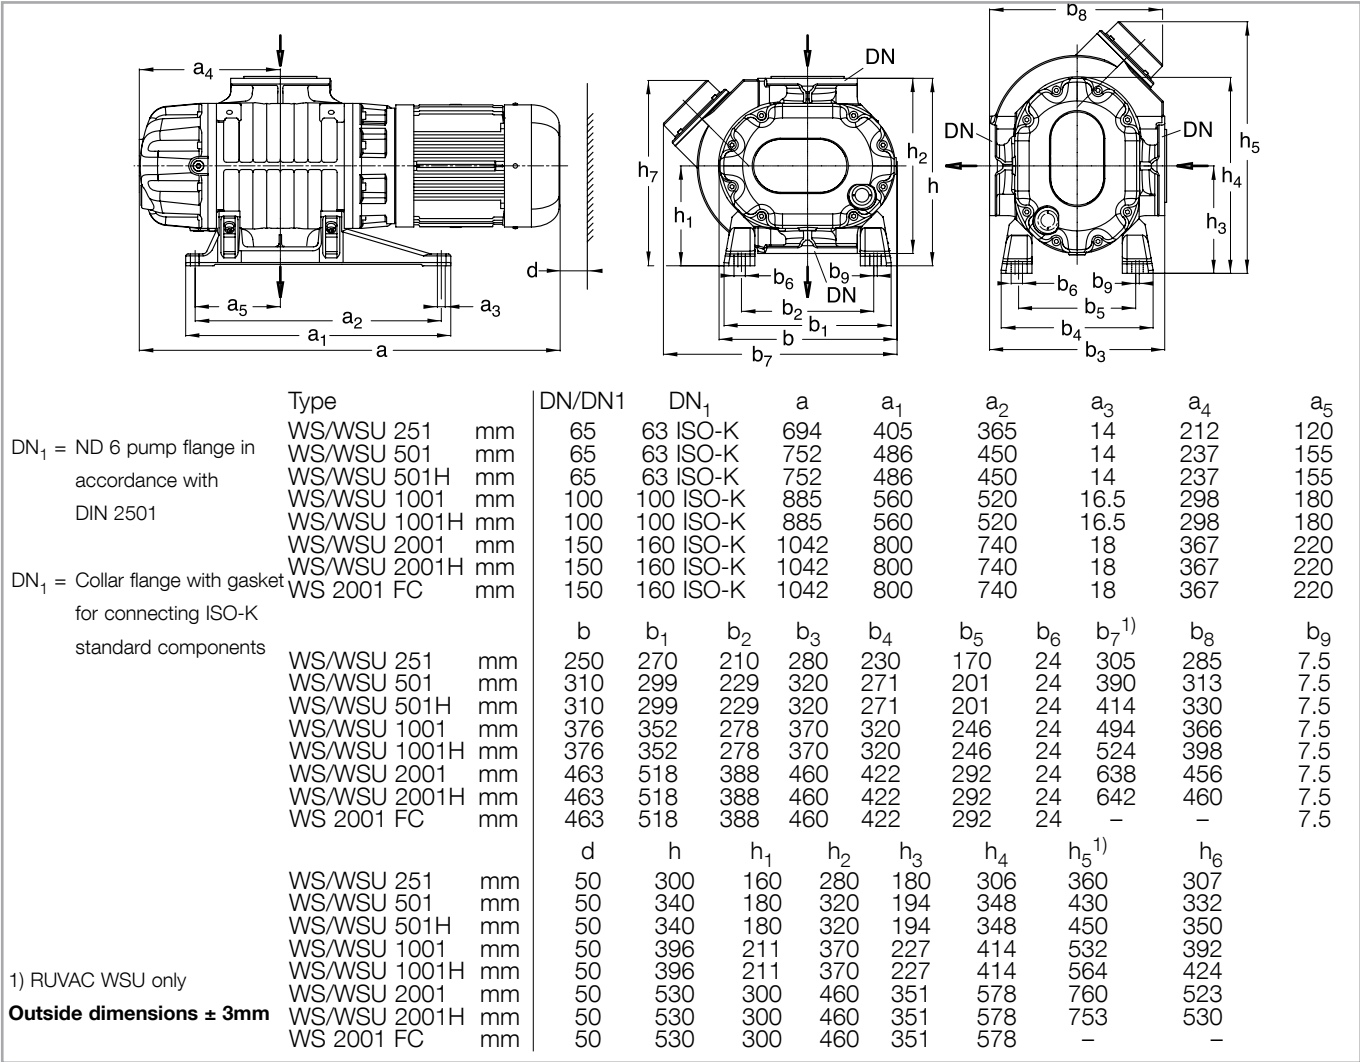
Dimensional drawing for the RUVAC WS/WSU
